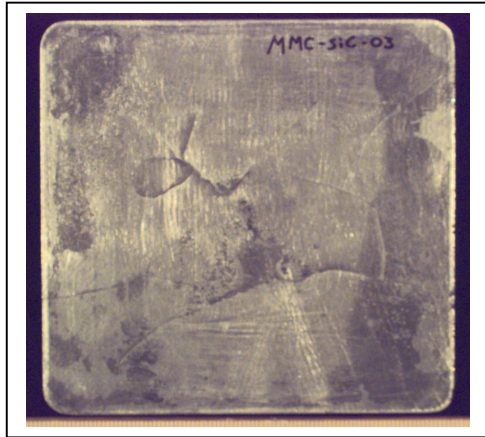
(c). Front surface of sample MMC-03 with cracking visible.
